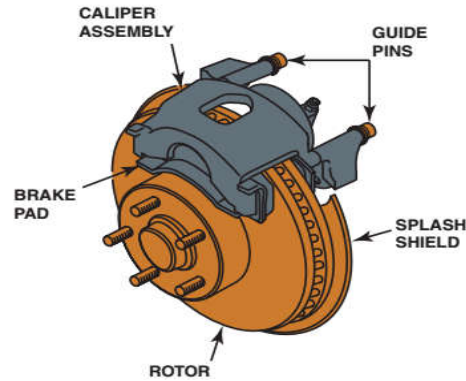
Typical disc brake assembly [ Halderman, 2012]
